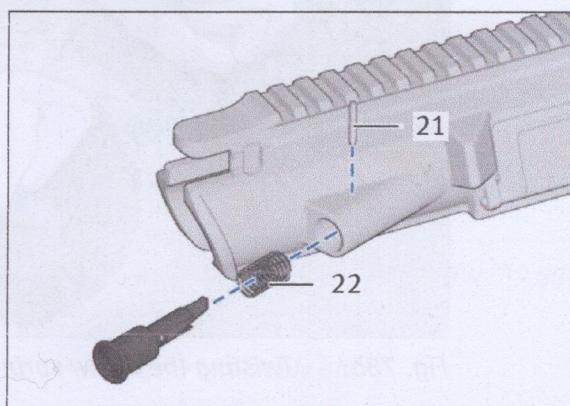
Forward assist, pressure spring and clamping sleeve
